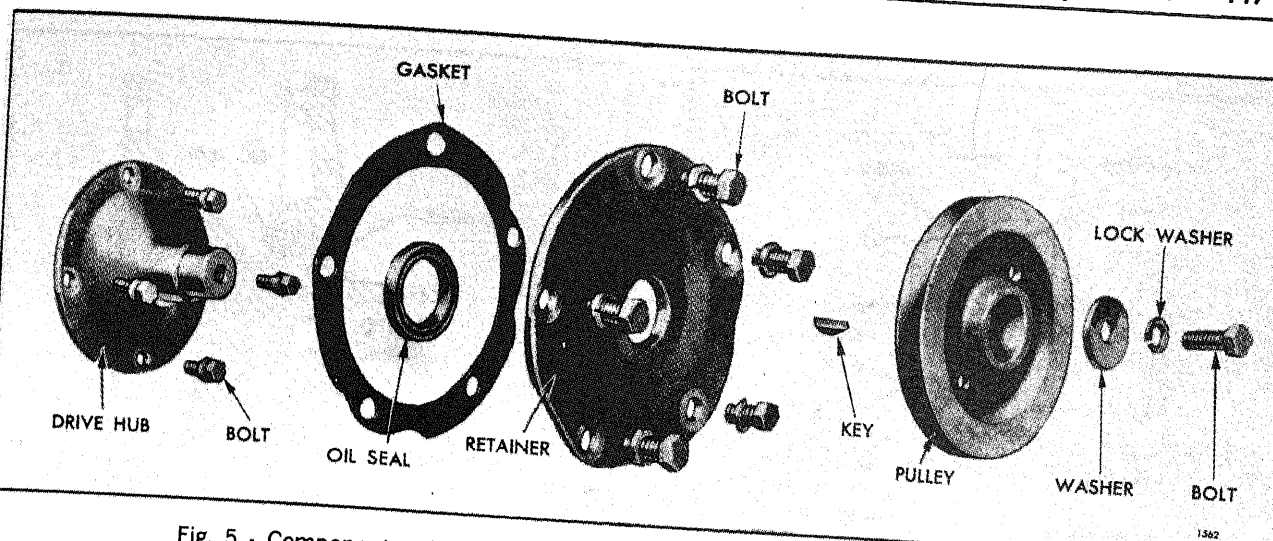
Components of Accessory Drive for Belt Driven Accessory (Drive Hub Type)
